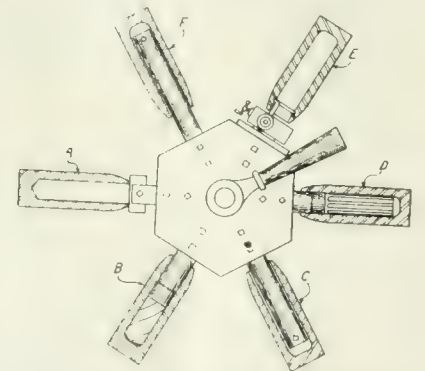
TURRET LAYOUT FOR FACING "NOSE AND FINISHING INSIDE OF SHELL.
